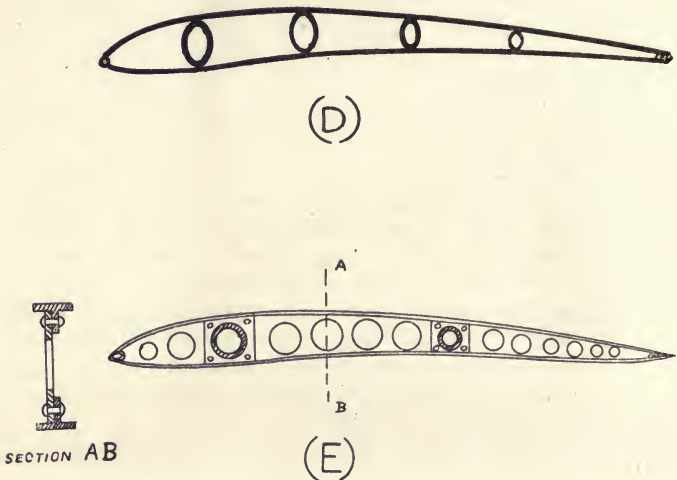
EXAMPLES OF STEEL WING CONSTRUCTION.
